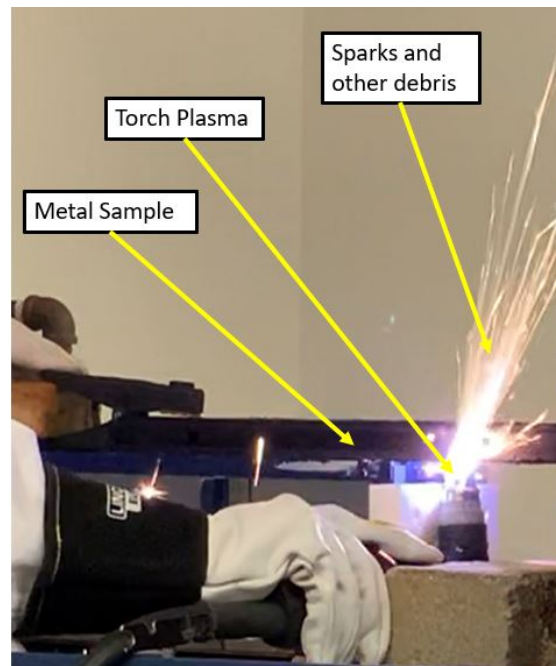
Plasma torch in use. Component being cut from below.
